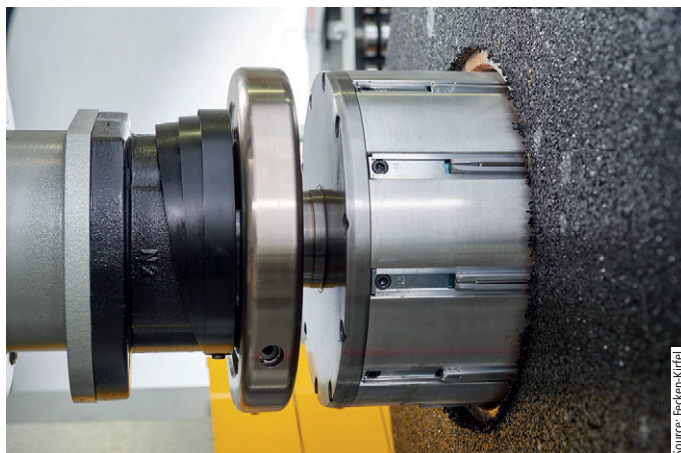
R 24 bandknife peeling machine – side trimming system and strip cutters
